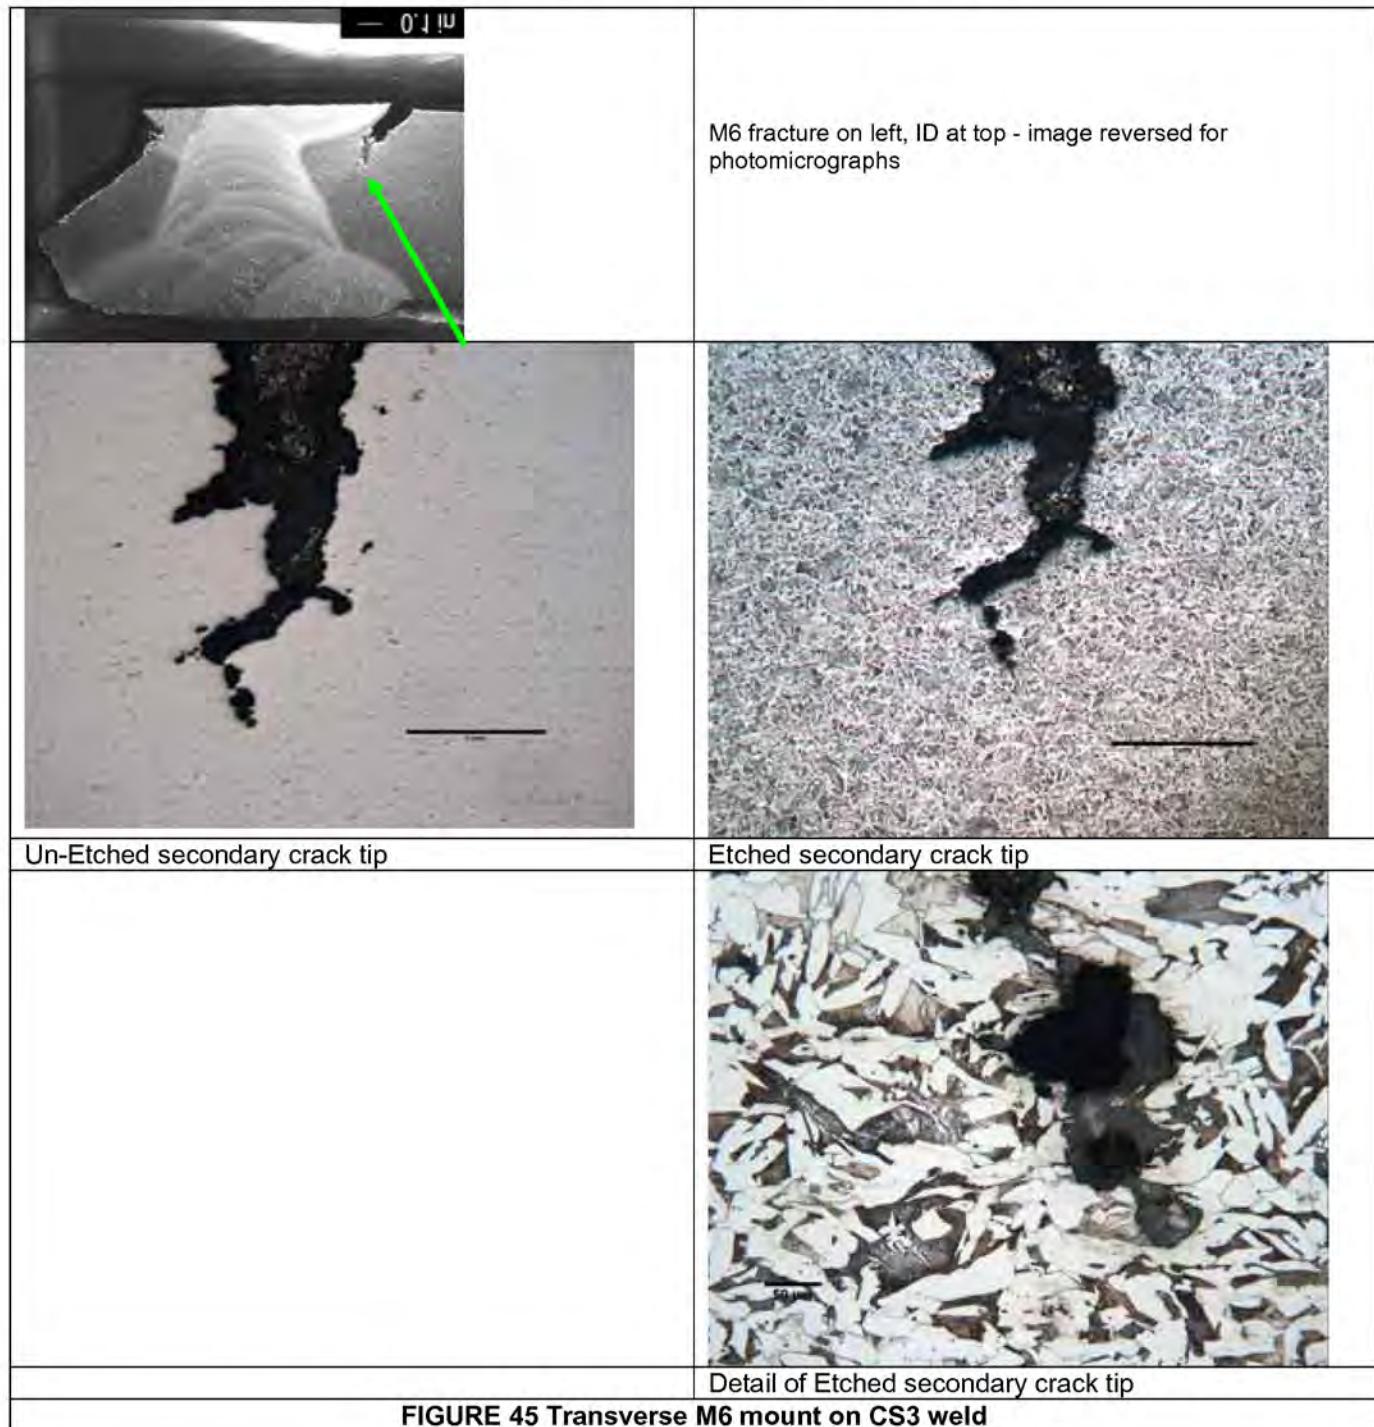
Transverse M6 mount on CS3 weld
